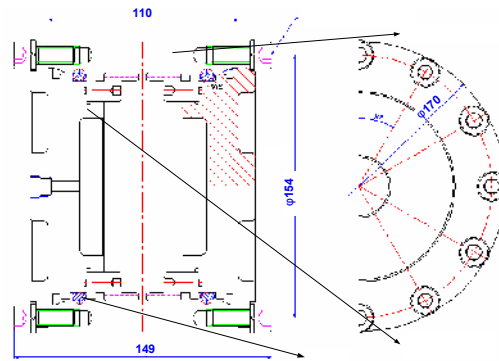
Loading device for O-ring under uniform squeeze rate.
